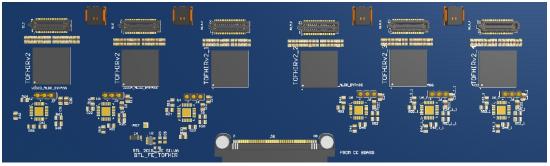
Layout of the FE board (dimensions $59.0 \times 206.0 \text{ mm}^2$).
